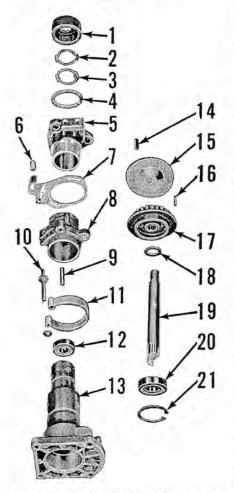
Exploded view of distributor mounting bracket and drive mechanism used on some models. Others, including magnetos, are similar.
